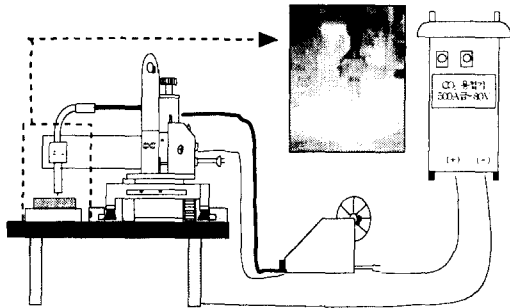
View of CO<sub>2</sub> welding used uto-carriage
